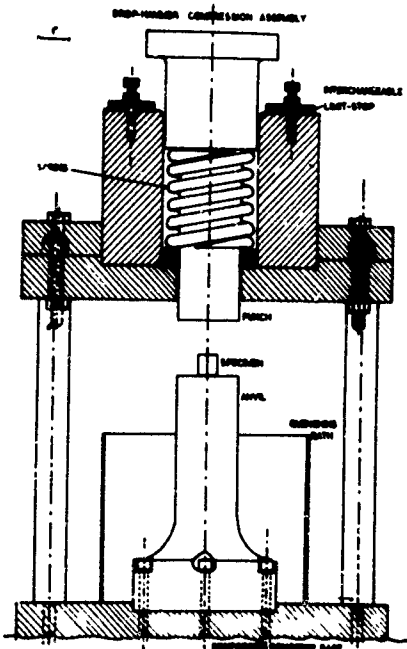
Scale drawing of the punch assembly on the drop hammer.
